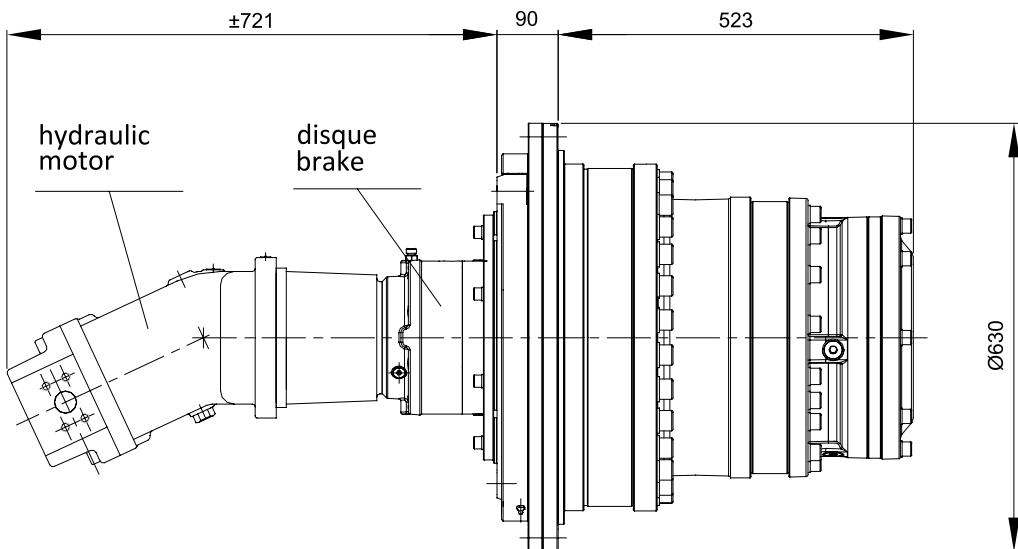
A Planetary gearbox as construction part of the winch drum with lamellar brake and variable hydraulic motor (Courtesy of Brevini)
